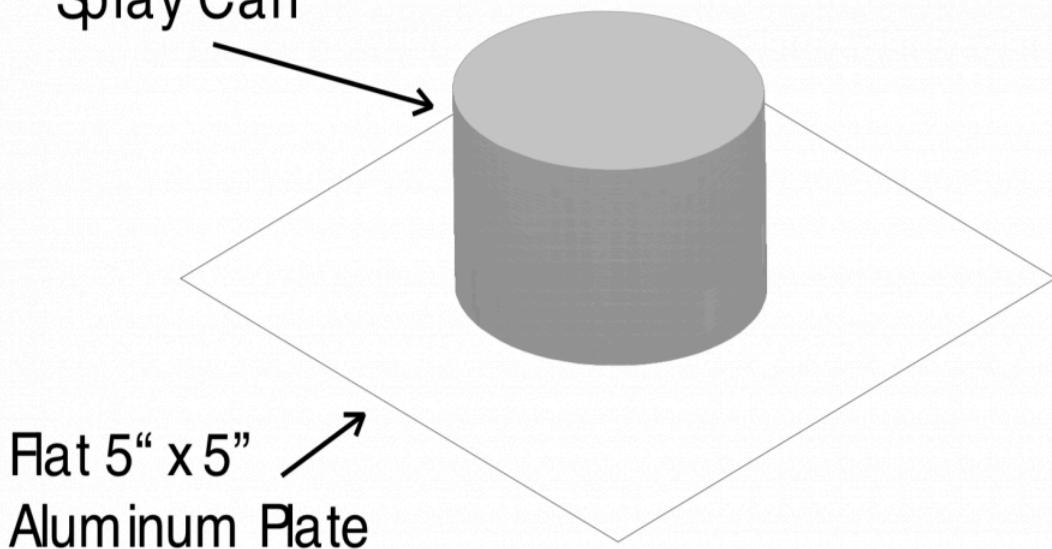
Mold Used to Make Fuel Servo Fiberglass Flange
